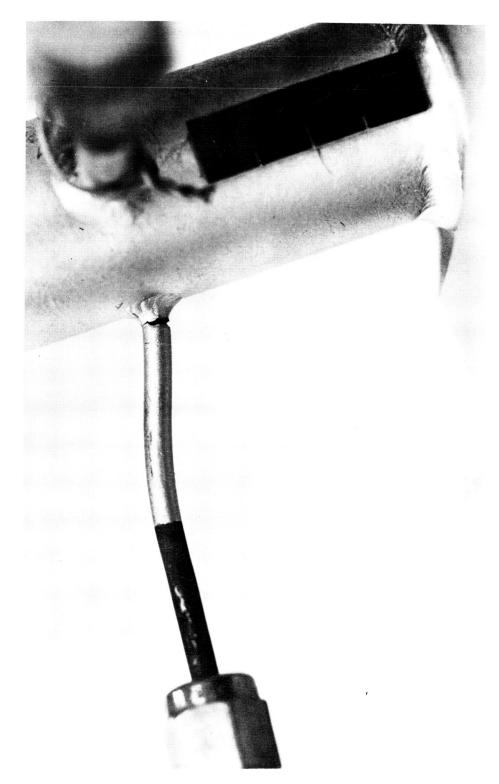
SNAP-8 mercury pump after vibration testing. Pump housing showing crack at weld of pump suction line, pressure tap.
